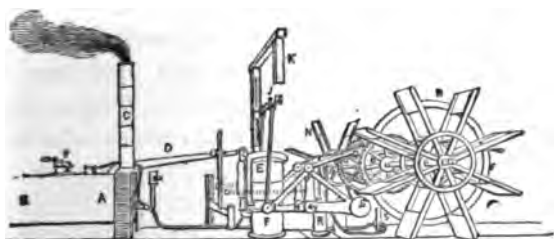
ENGINE OF THE CLERMONT, 1807.
